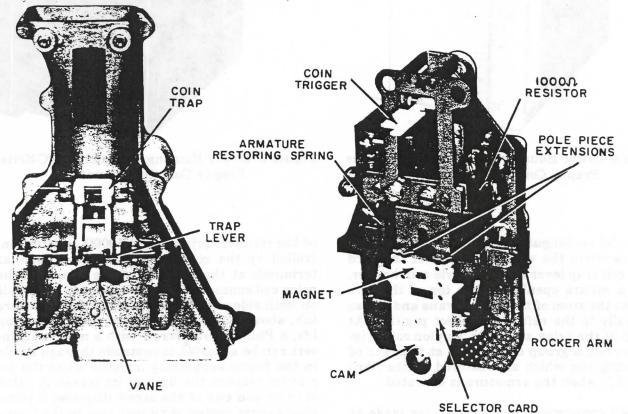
Single-Coil Coin Relay and Hopper Assembly.
